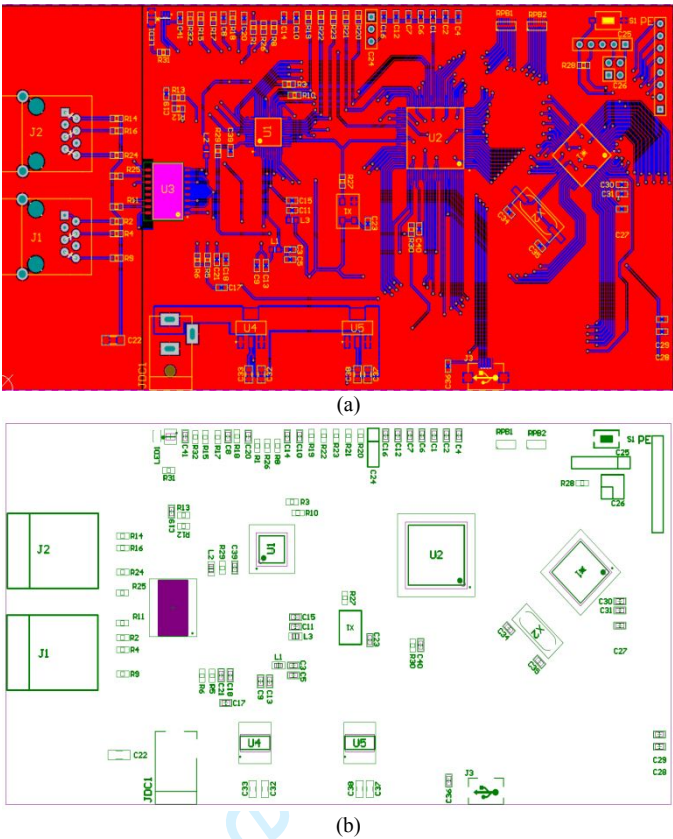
Design of the proposed control board, (a) PCB layout and (b) location of parts.
